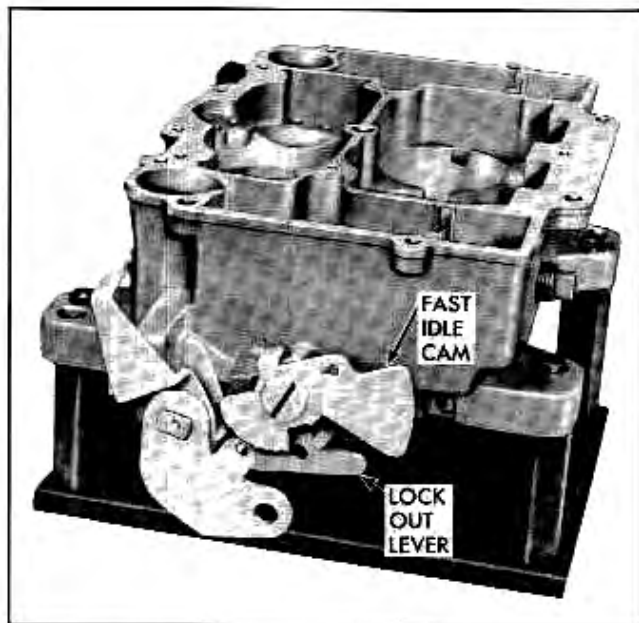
B-78 Location of Fast Idle Cam and Lockout Lever
